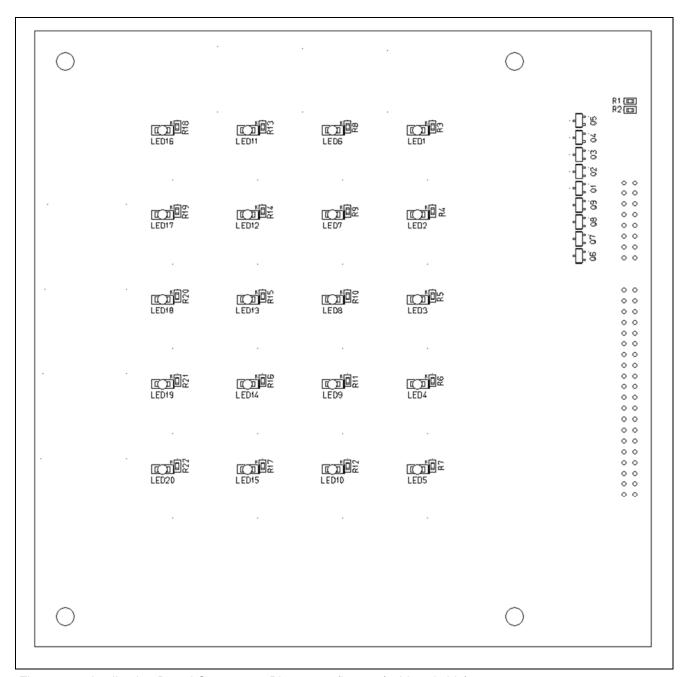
Application Board Component Placement (bottom/soldered side)
